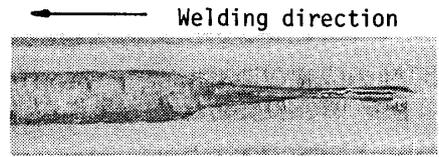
Horizontal section of EB welds in case C type crack occurred
